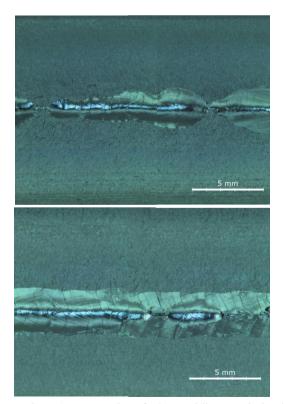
An example of the welding optimization process showing initial, not optimized (upper) and optimized (lower) equator welding seams.
